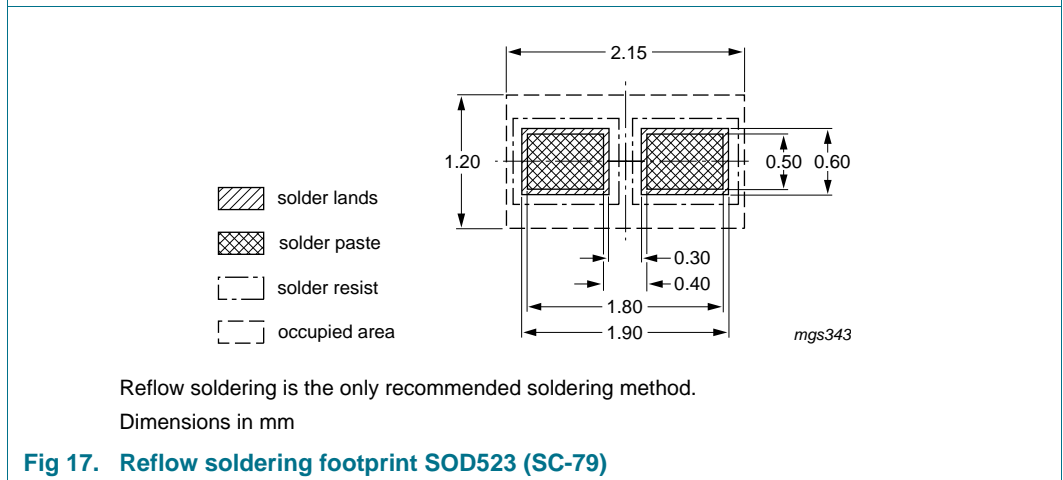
Reflow soldering footprint SOD523 (SC-79)
